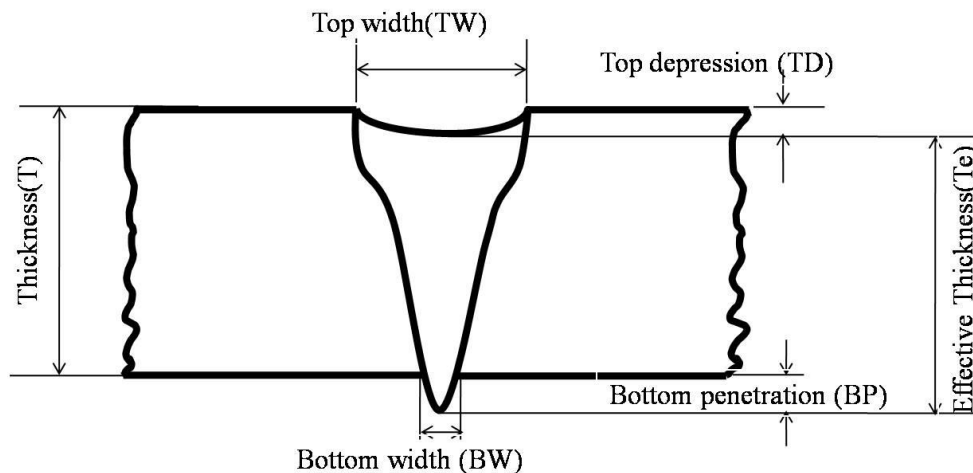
Schematic sketch showing the weld bead geometry of electron beam weld joint
